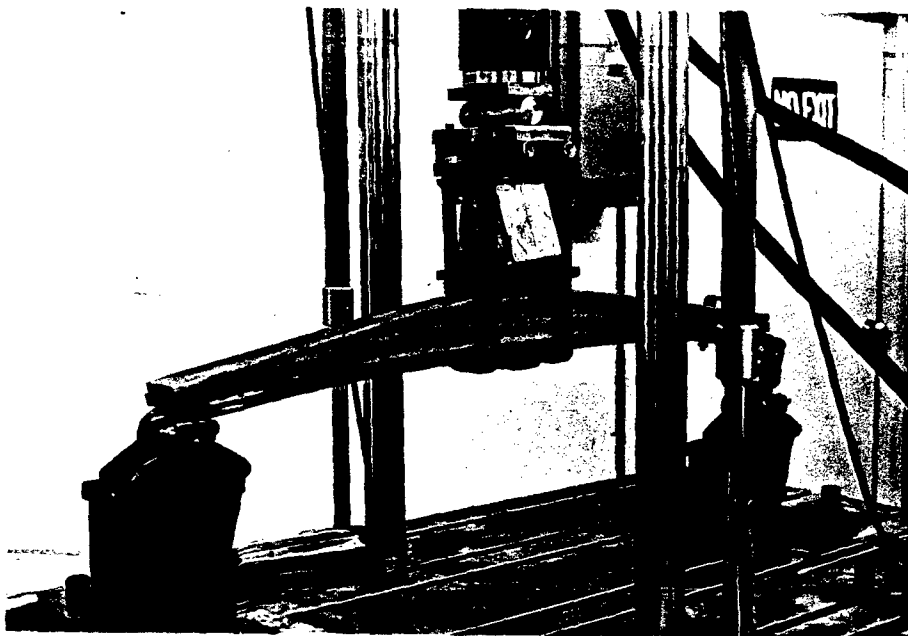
(b) SPRING ASSEMBLY TEST SET-UP
